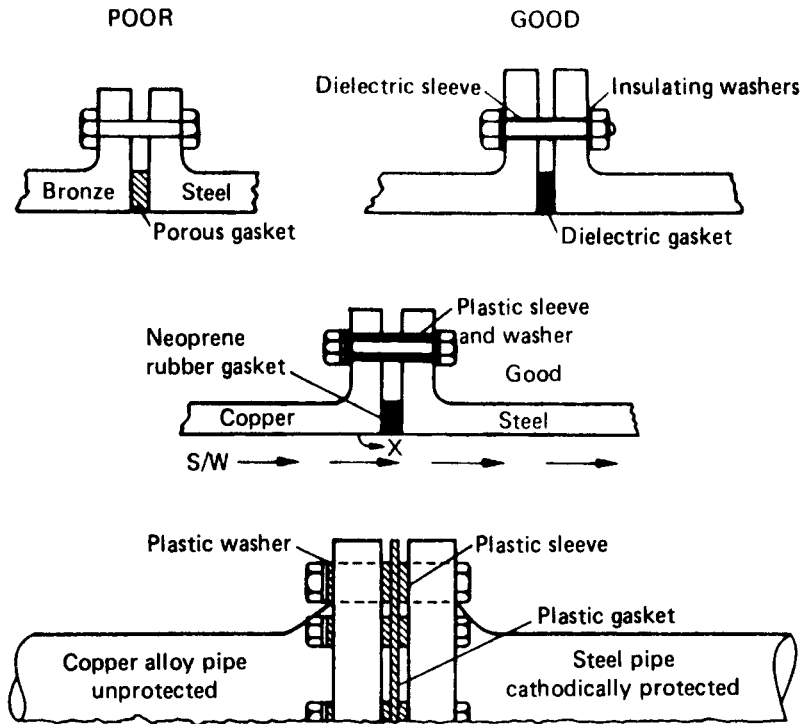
Gasket insertion between pipe flanges for sealing purposes and to minimize galvanic corrosion between dissimilar piping metals.
